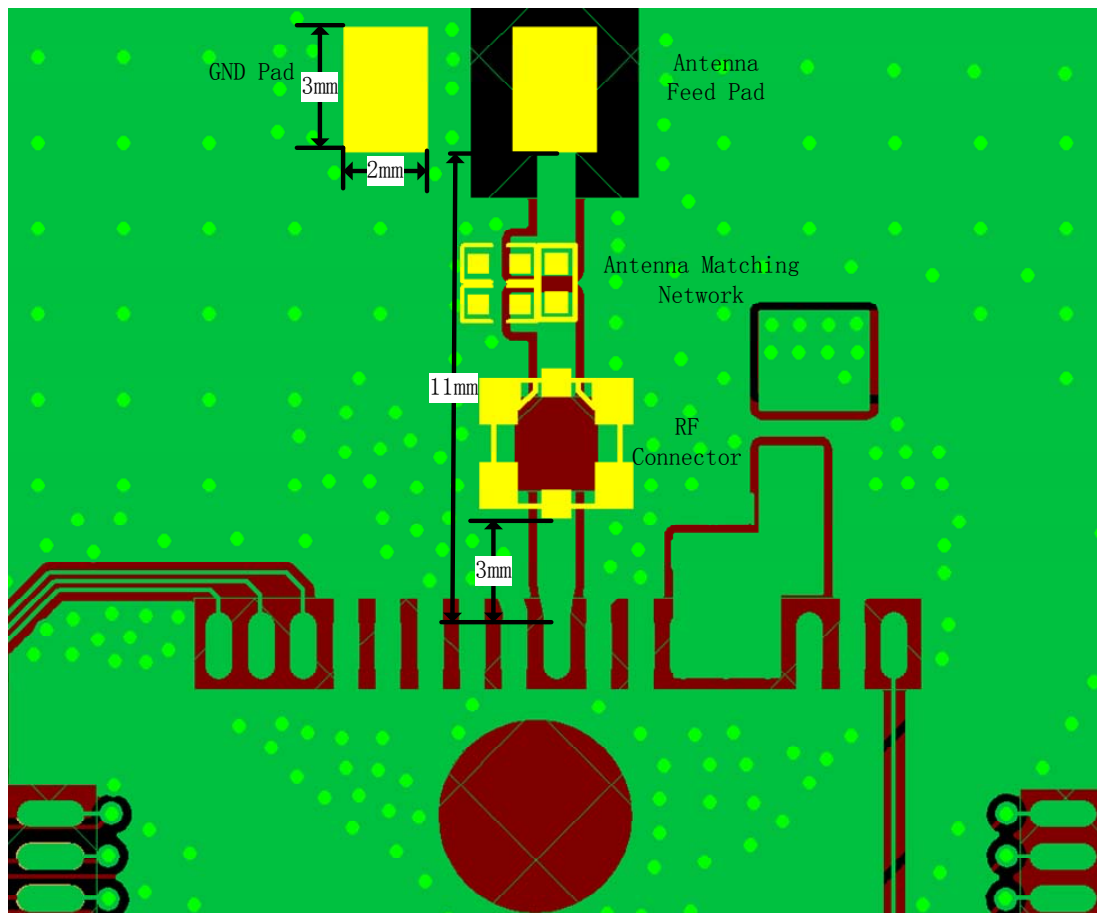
Components placement and PCB layout (non-50 ohm antenna)
